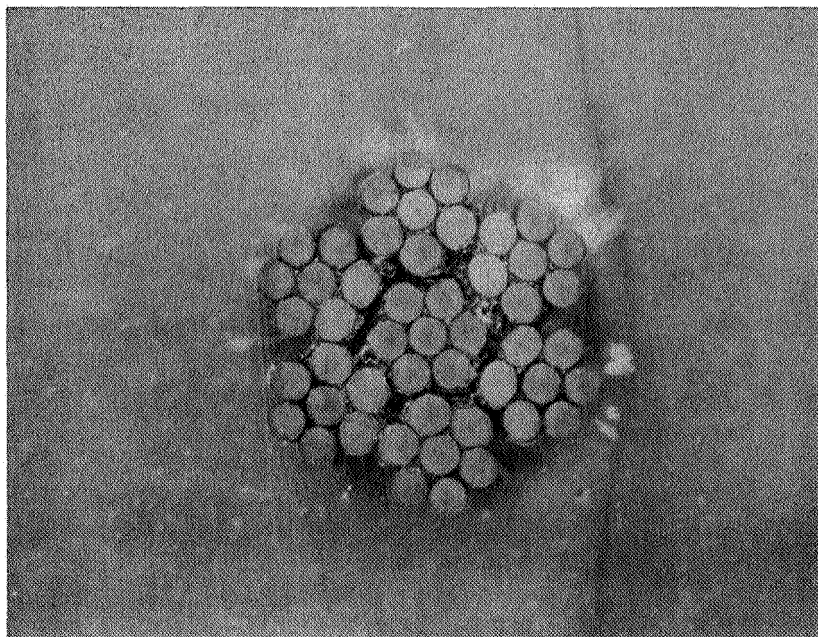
Appearance of 7 x 3 Cable Fabricated From 0.012-in. Diameter Tungsten Wire
